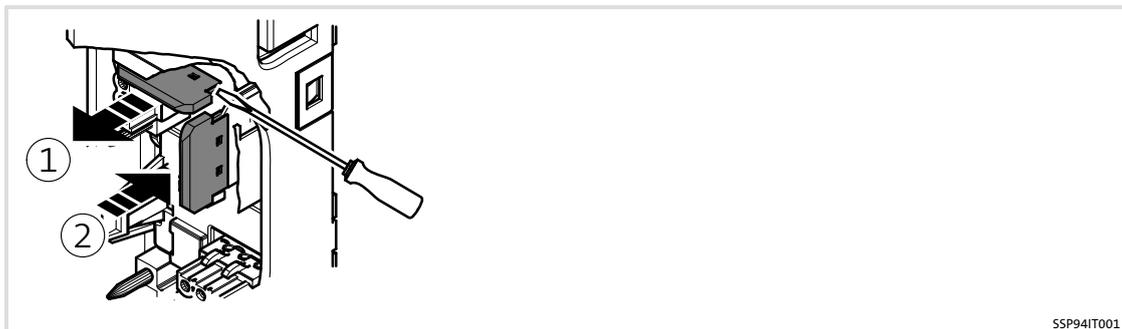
Plugging the IT insulating cap onto the earthing jumper
